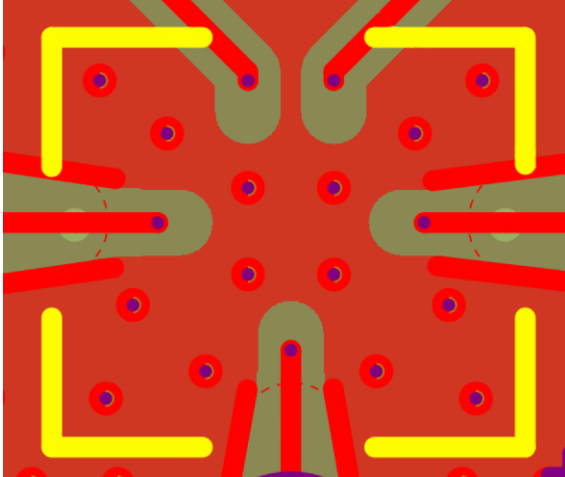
OTSW100 Eval Board PCB Footprint (Altium)
